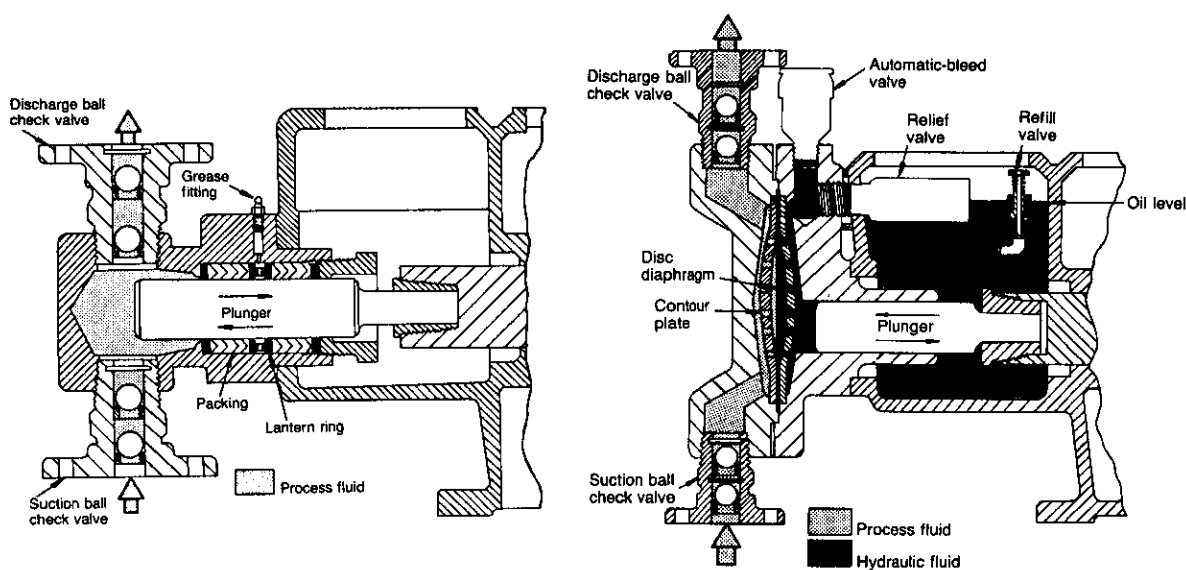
View of Fluid End of Reciprocating Pump^(14.11)
